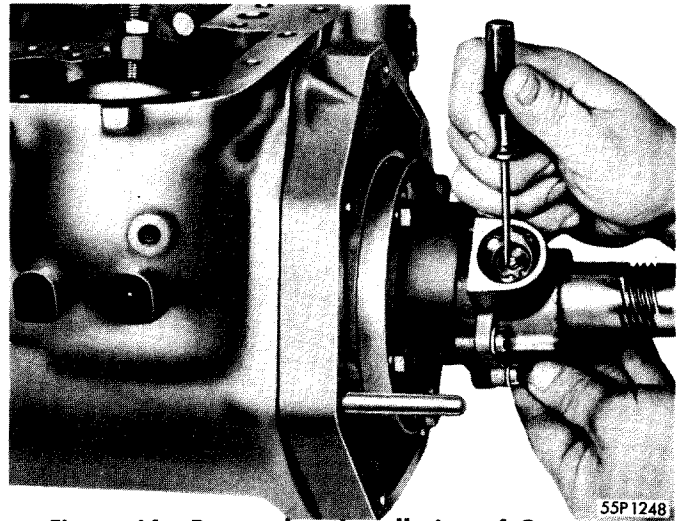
Removal or Installation of Governor Valve Shaft Snap Ring
